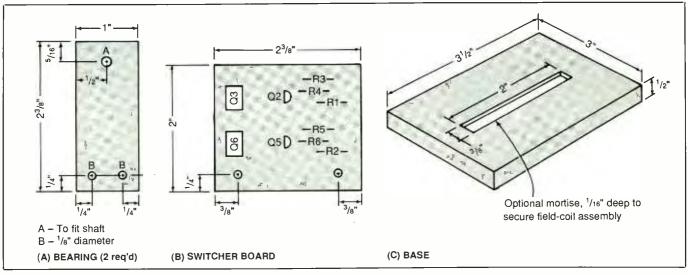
Fabrication details for bearings (A), circuit-board assembly (B) and base plate (C).
